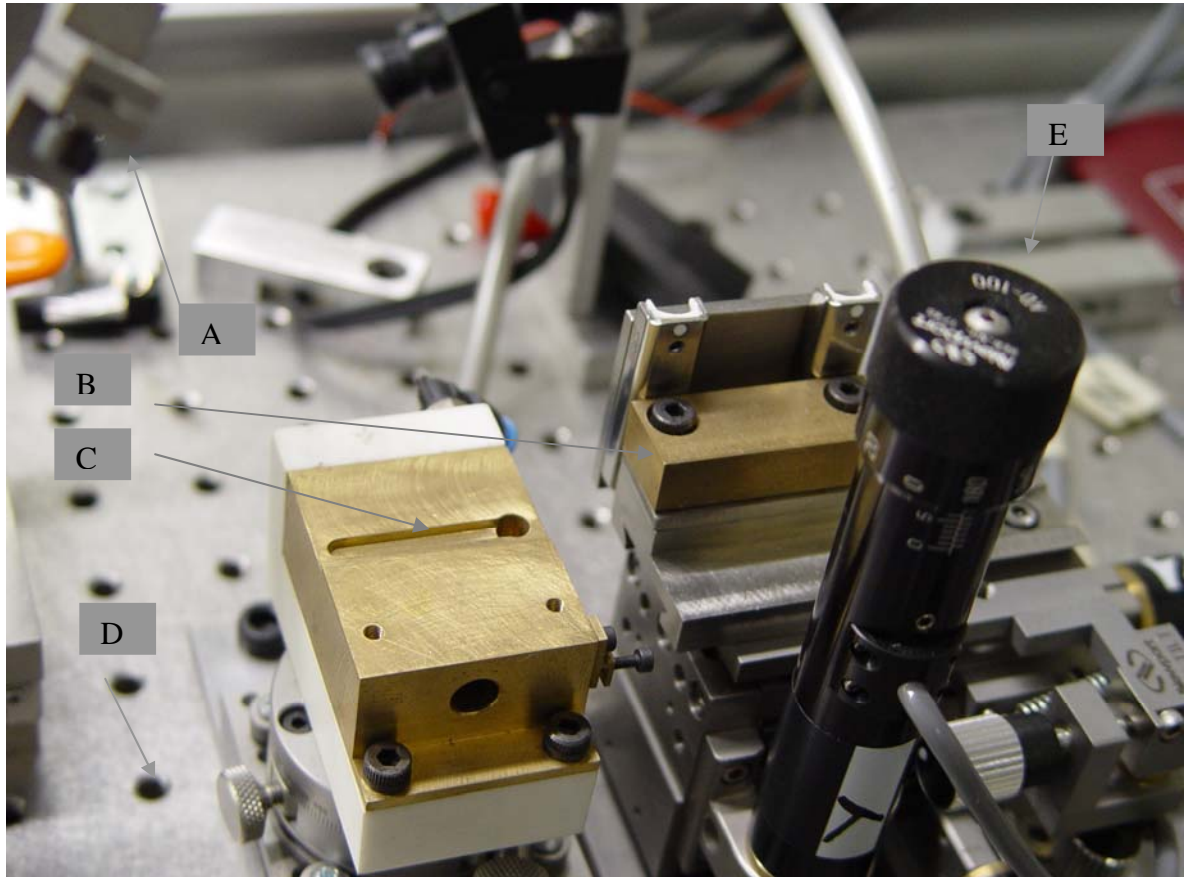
Customised assembling jig. Jig was used for coupling optical fibre to photodiode.
